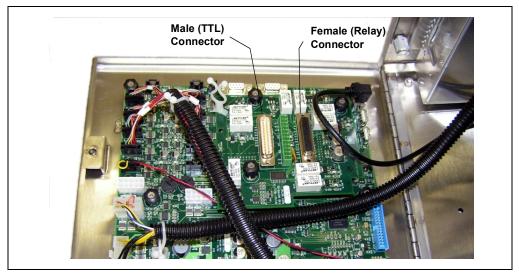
TTL/Relay Controller Board Installed on Main SP Electronics Board
